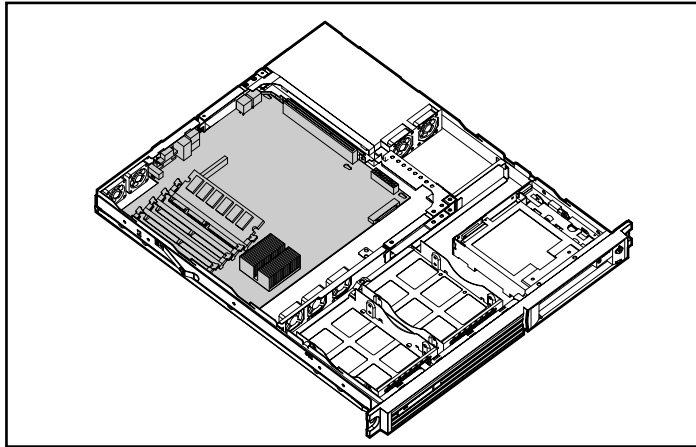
Locating the system board in the ProLiant DL320 server (PCI riser board assembly removed for clarity)
